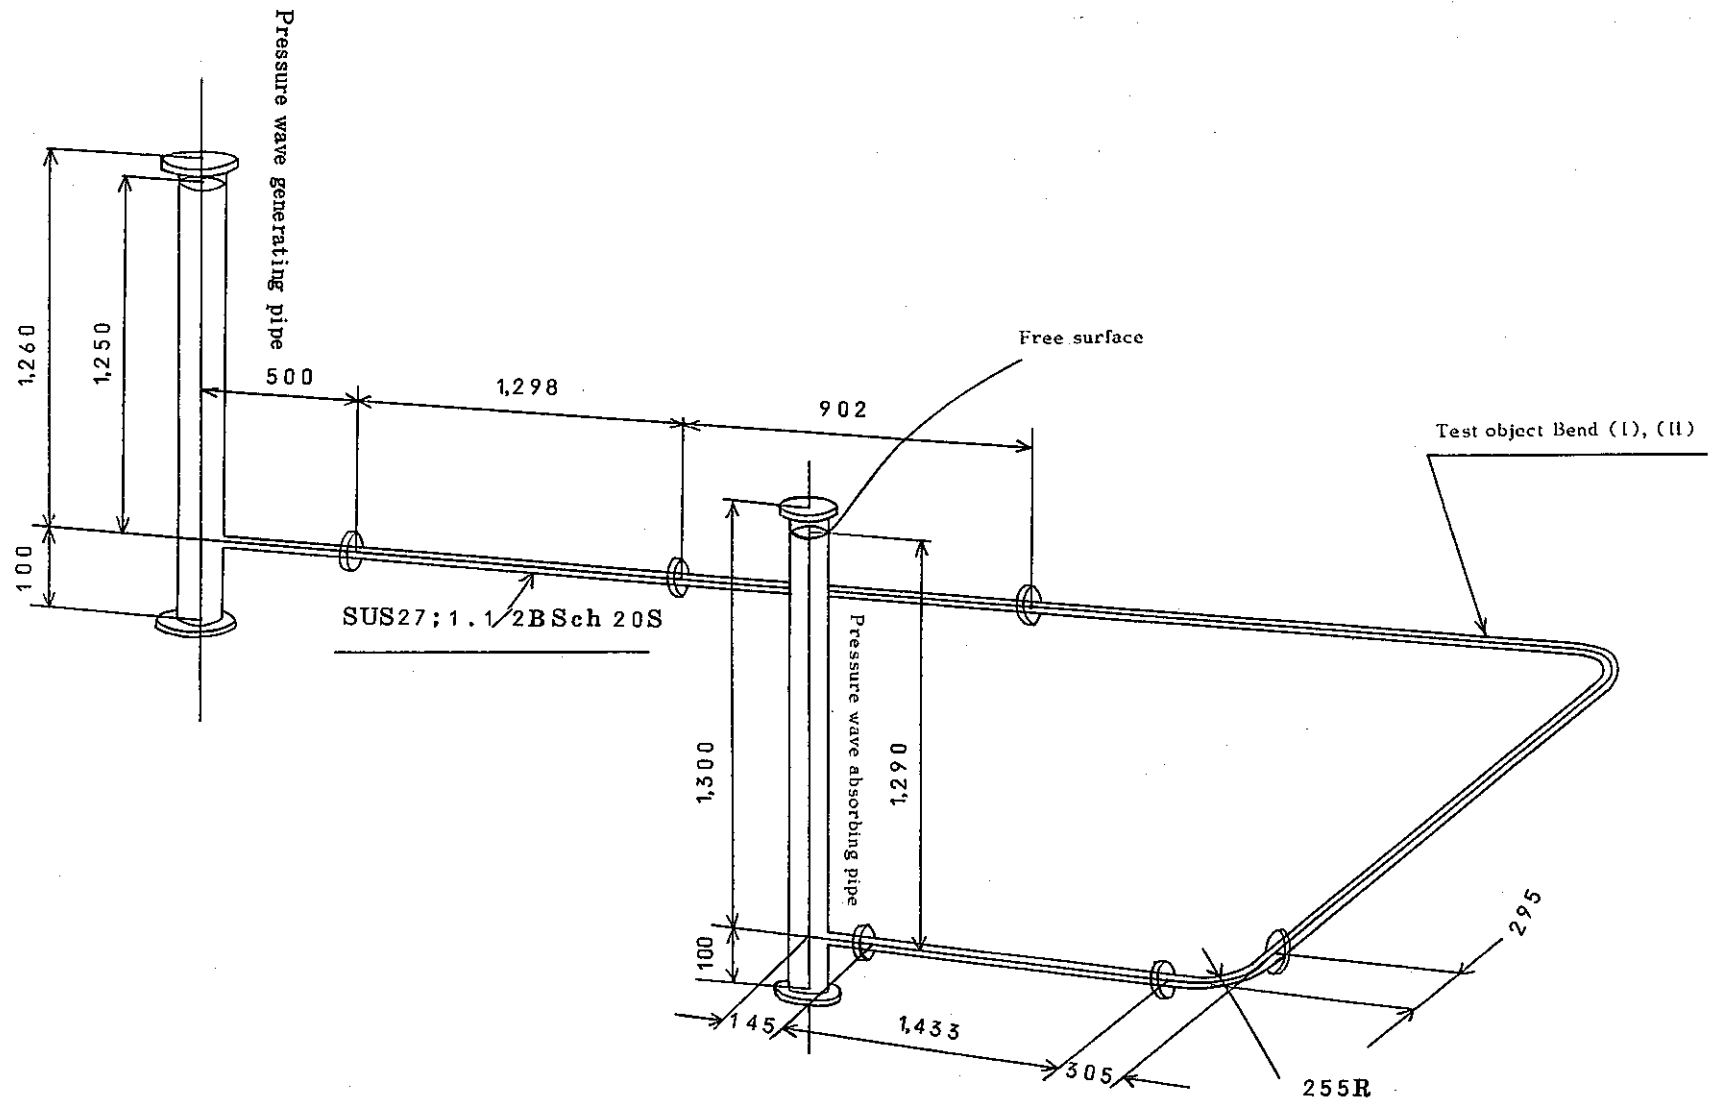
Sketch of Testing Part for Bend (I), (II)
